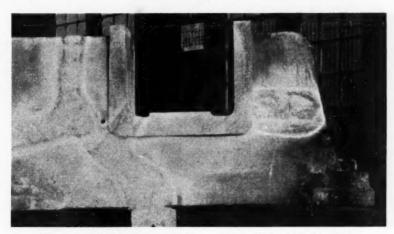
Finished Bronze Welds on Front End of Engine Bed
